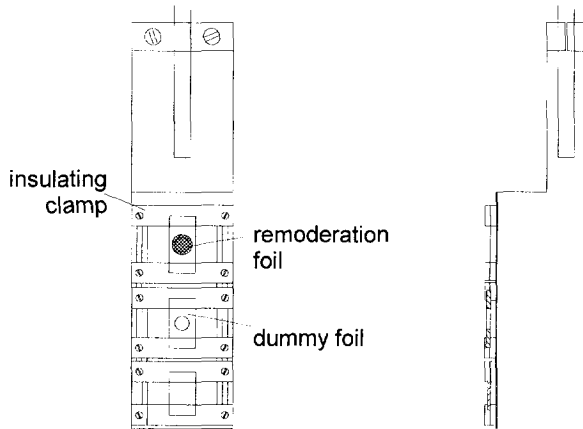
Holder of both the remoderation foil as well as the dummy foil with the hole in it. (drawing by K.J. Roos)
